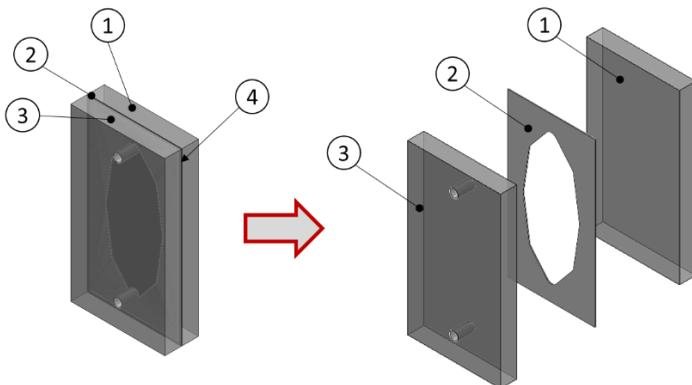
Sealed Window Assembly (assembled & exploded view) (GS022XY)
